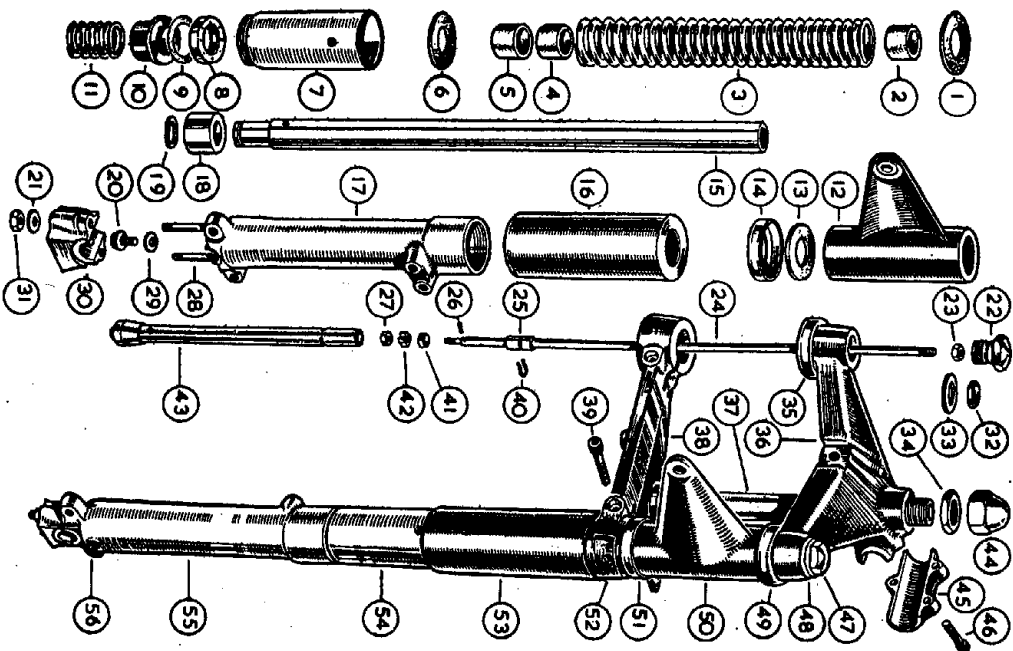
EXPLODED VIEW OF FRONT FORKS FITTED TO 1953-54 MODELS.
